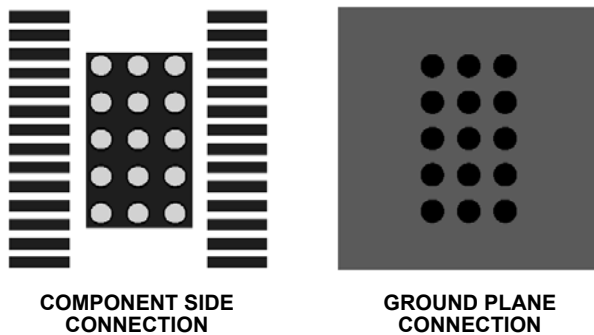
PCB LAYOUT - 28 Ld HTSSOP PACKAGE
